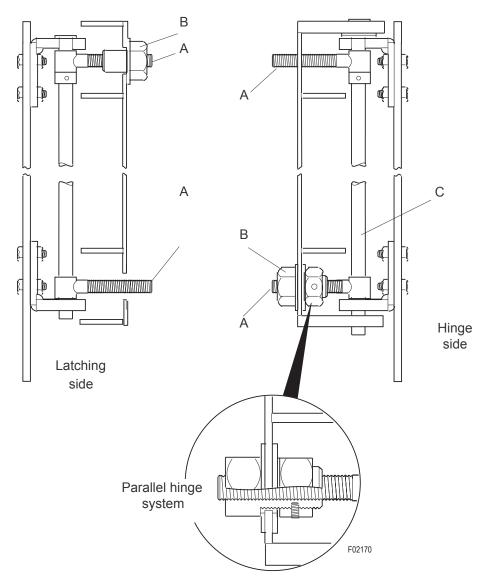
DOOR HINGE AND LATCH ASSEMBLY
